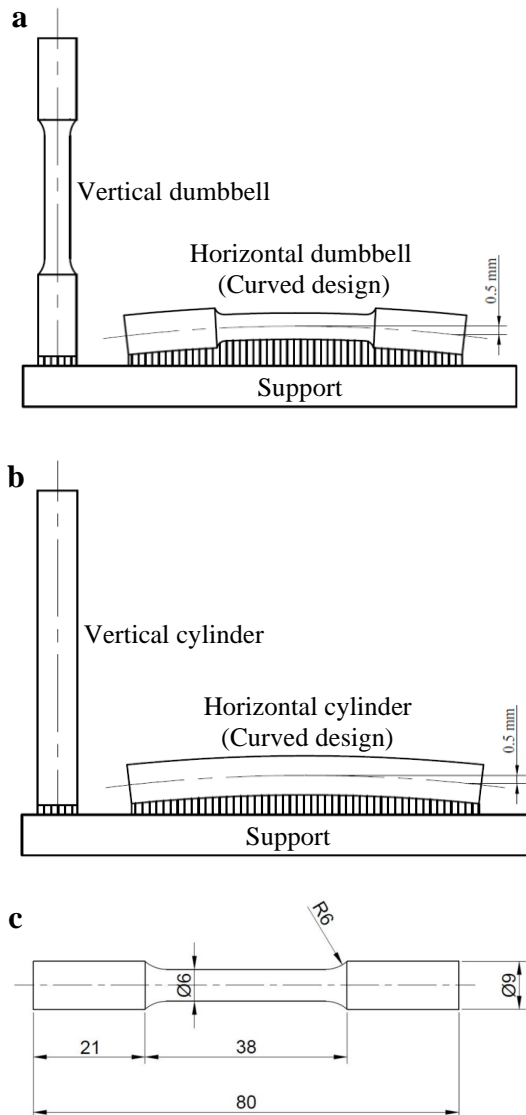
a) Vertical sample and reversed deflected design of a horizontal dumbbell shape sample attached to the substrate, b) Vertical and horizontal cylinder to be machined, and c) Final test specimen dimensions, (all units in mm).
